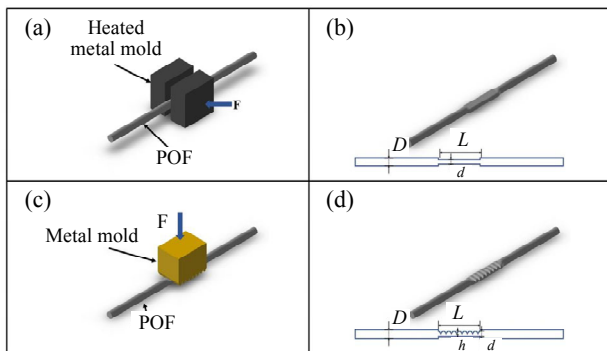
Fabrication process of the LPG imprinted on the flat-shaped POF: (a) schematic of fabricating the flat-shaped POF by the pressing with the heat pressure, (b) schematic of the flat-shaped POF, where L , d , and D are the length, thickness, and diameter of the flat-shaped POF, (c) schematic of fabricating an LPG imprinted on the flat-shaped POF by a mechanical die-press-print method, and (d) schematic of the LPG imprinted on the flat-shaped POF, where h is the groove depth of the LPG.
